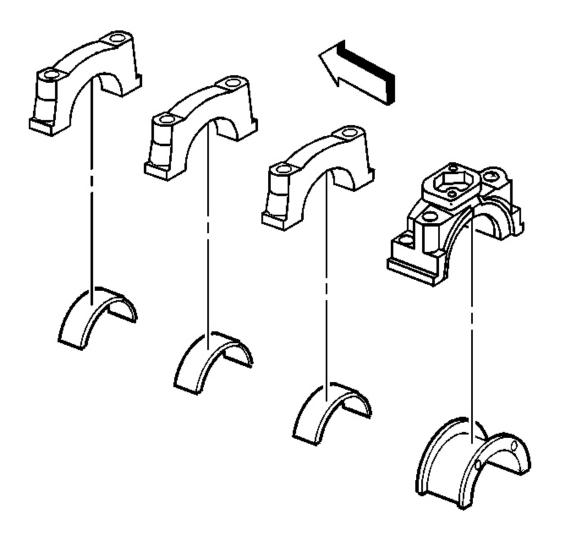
View Of Crankshaft Bearings & Crankshaft Bearing Caps Courtesy of GENERAL MOTORS CORP.
